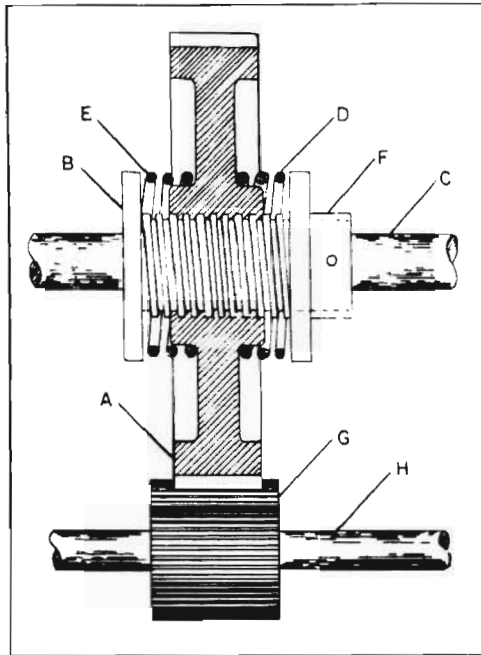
Gear drive that employs springs to cushion the effects of shock loading in either direction.
